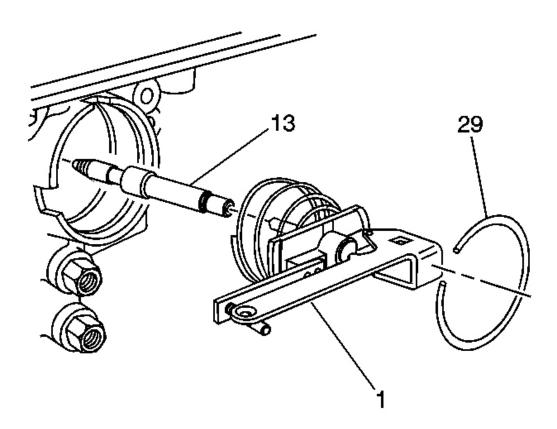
View Of J 33037, Band Apply Pin & Servo Cover Retaining Ring Courtesy of GENERAL MOTORS CORP.
